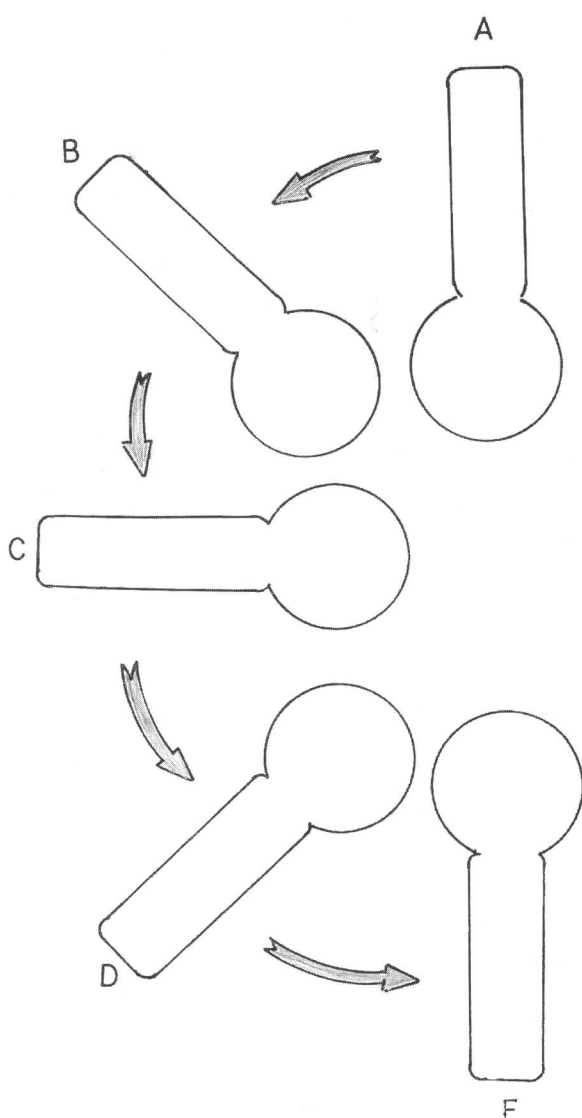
Positions of the mould-crucible assembly as the crucible is heated in the furnace (A), and the mould cavity is slowly poured (B-E).
